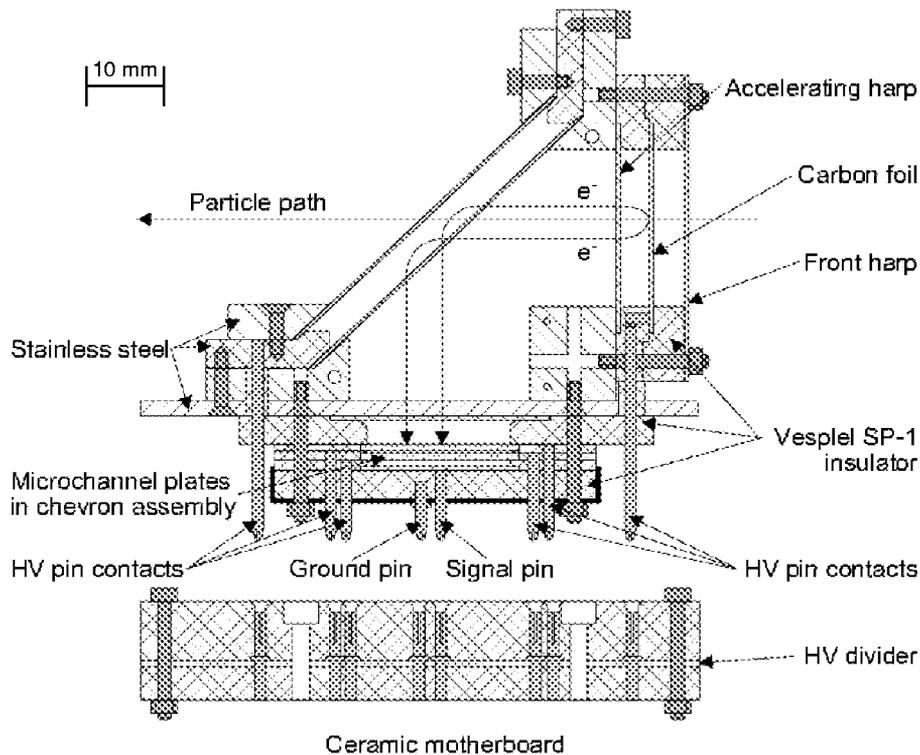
A layout (side) view of the microchannel plate mounting assembly with pin contacts.
